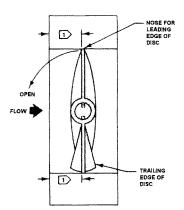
Checking disc position for rotary valve actuator adjustment
